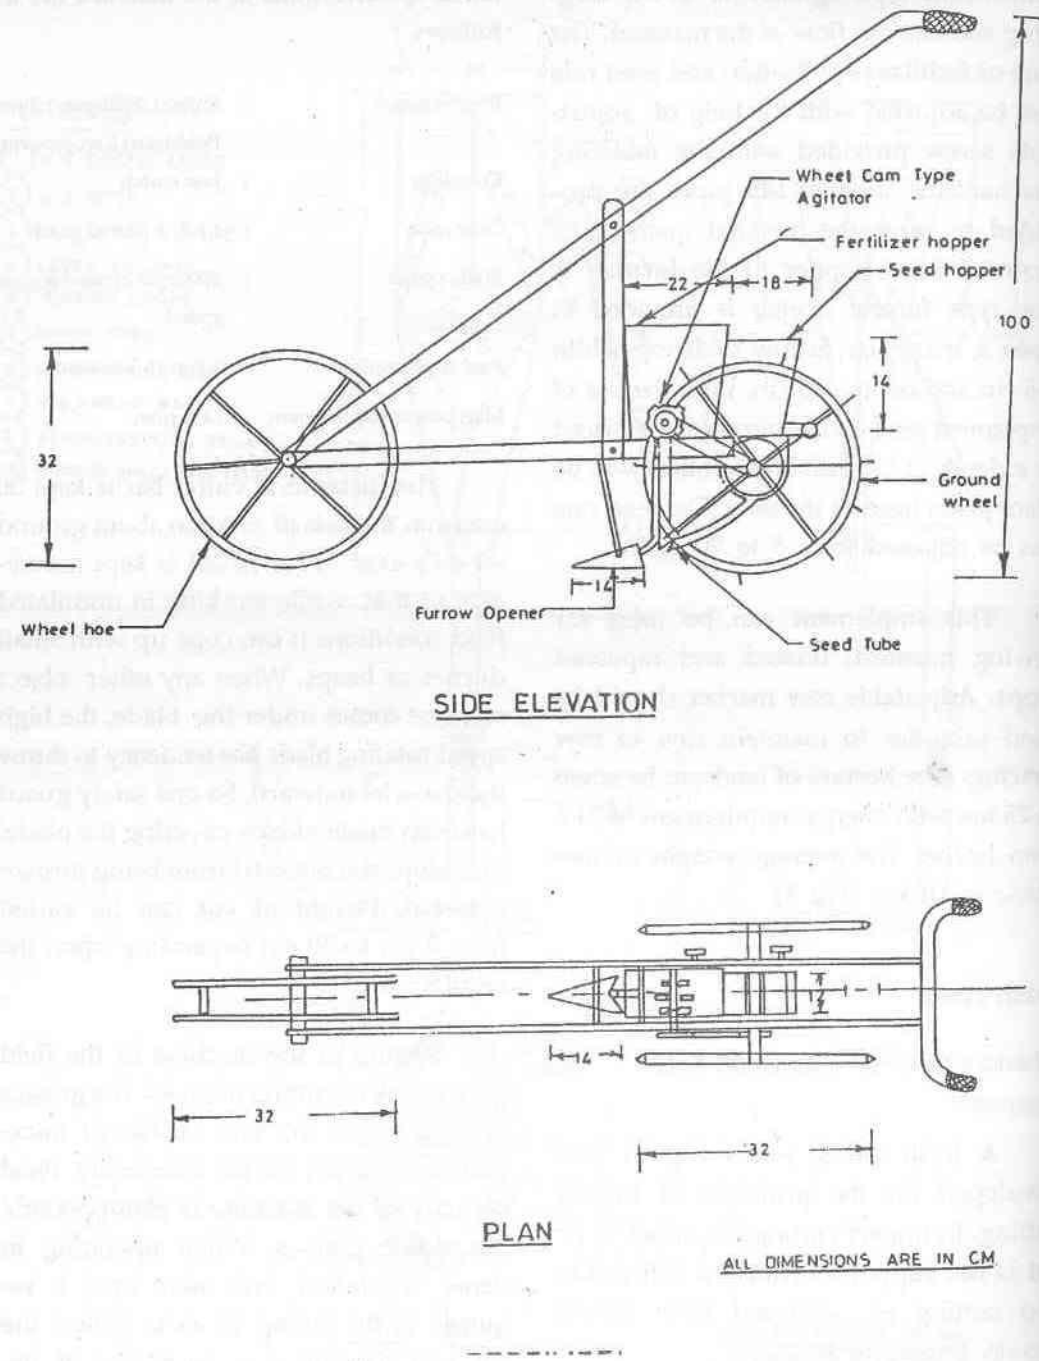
Wheel hoe seed-cum-fertilizer drill
